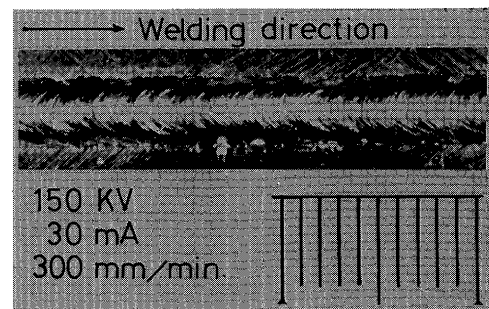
Appearance of weld ripples at bead surface.
